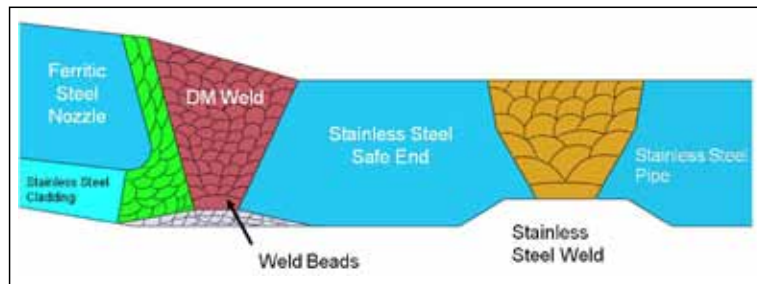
Cross-section of nozzle to pipe weld highlighting weld bead pattern
